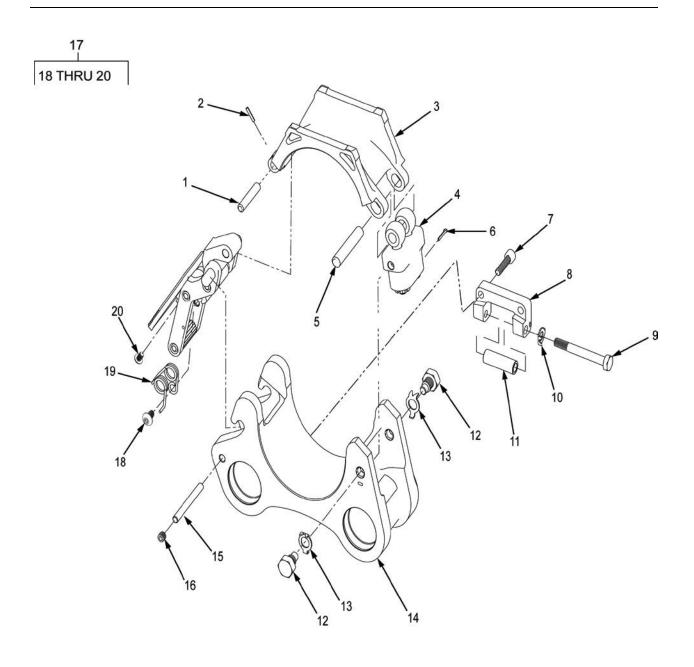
Recoil Mechanism Buffer 12901600 and Clamping Catch 13015840.
